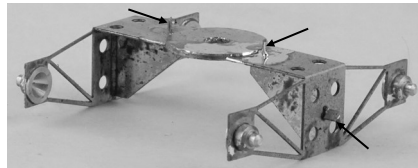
The spacer is folded over and soldered to the top of the bolster and twist tabs (arrowed) on the gussets are used to secure the bolster at 90° to the sideframes.
